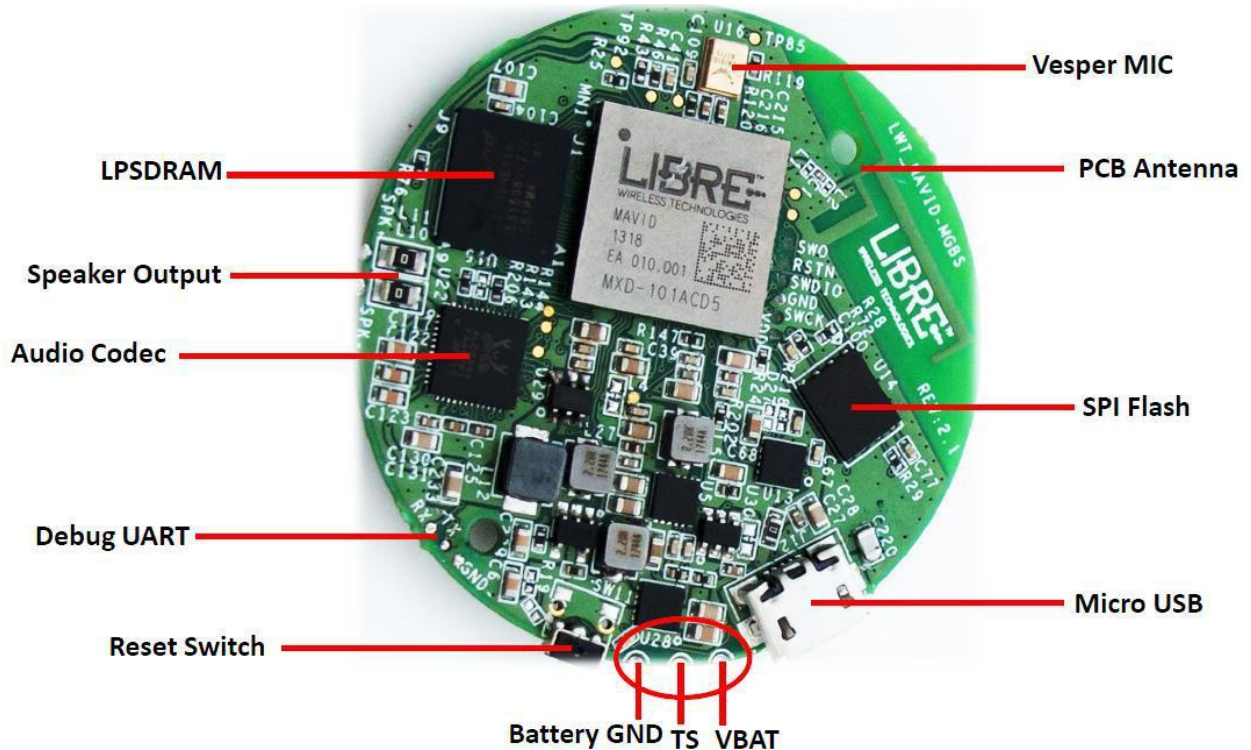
GBS-Minitower PCBA Bottom View
